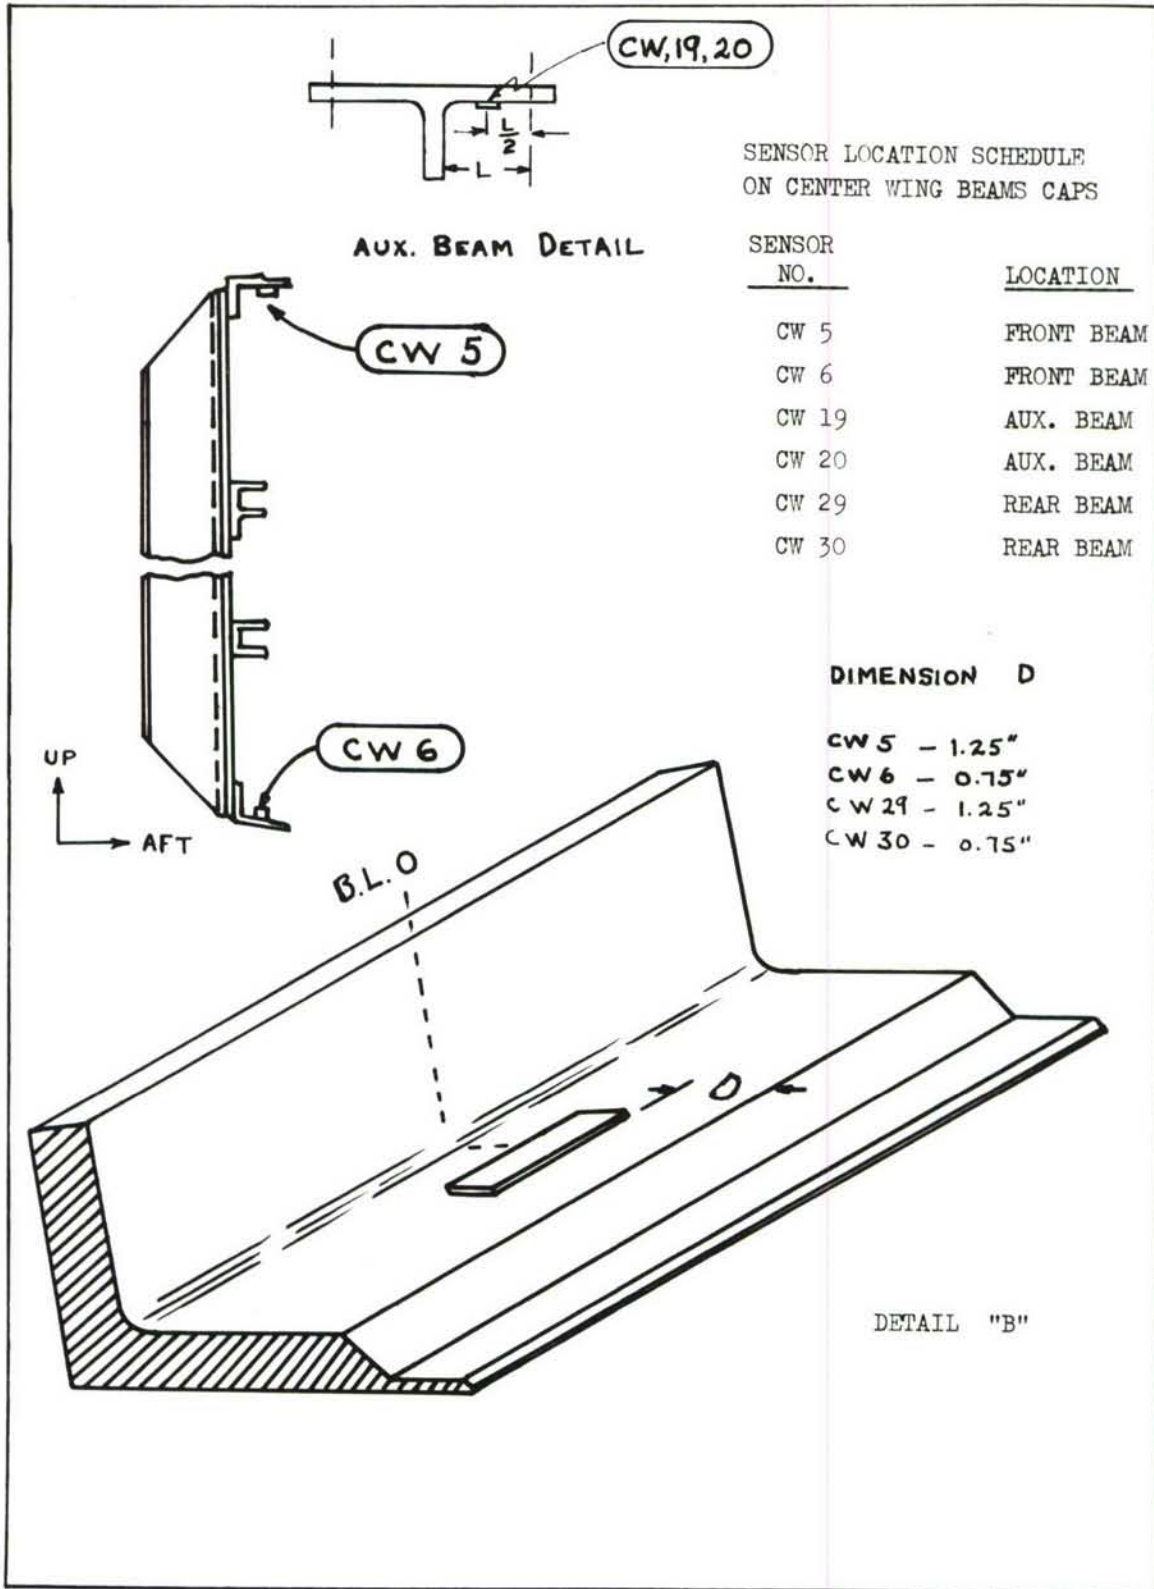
TYPICAL SENSOR INSTRUMENTATION DETAILS ON THE CENTER WING BEAM CAPS
